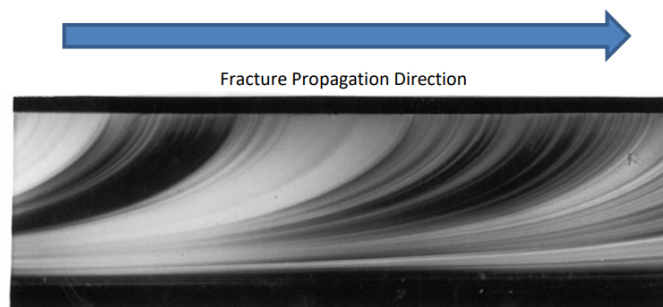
A. - Fracture Face Produced by Bending (Edge View)
